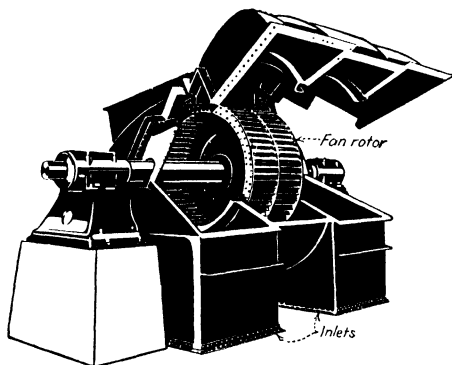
Double-inlet induced-draft fan. (*American Blower Company.*)
